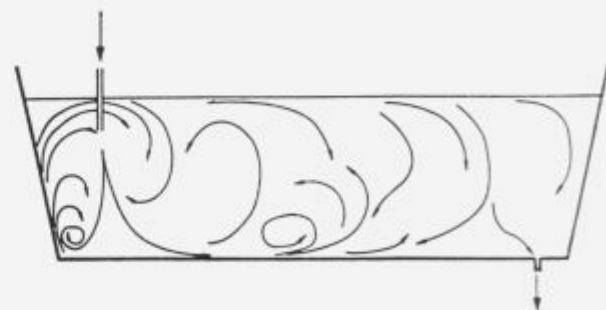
Tundish with one-strand continuous casting machine. Kjer so vrednosti:
